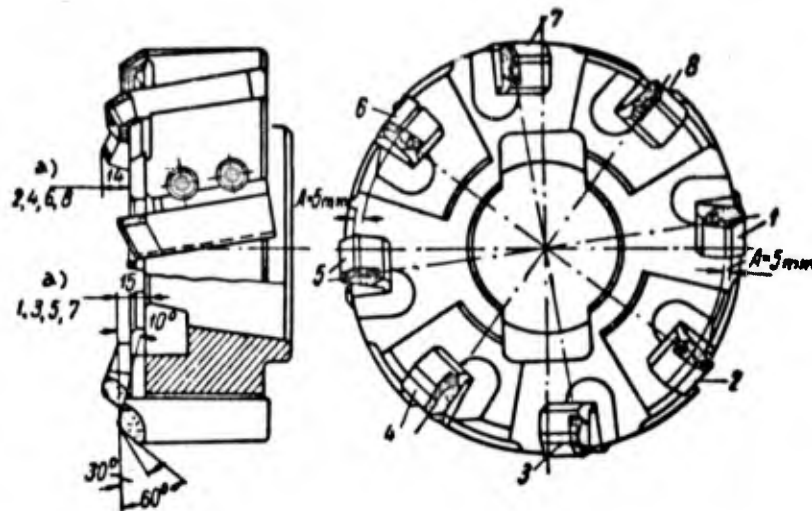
Two-Step Clamped-On End Mill with Inserted Prismatic Teeth
